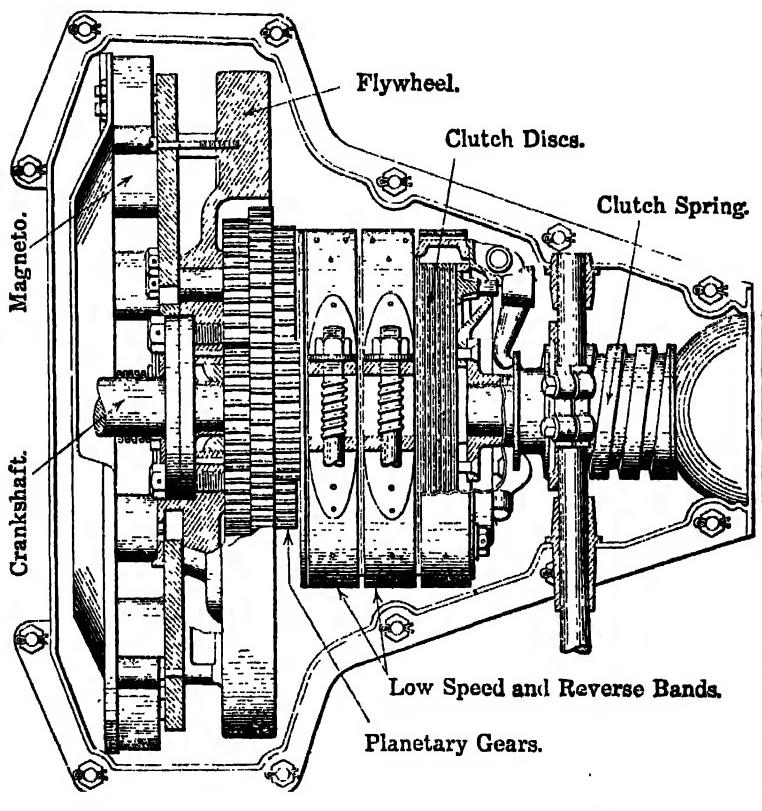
Top View of Two Speed and Reverse Planetary Gear Employed on Ford Cars.
